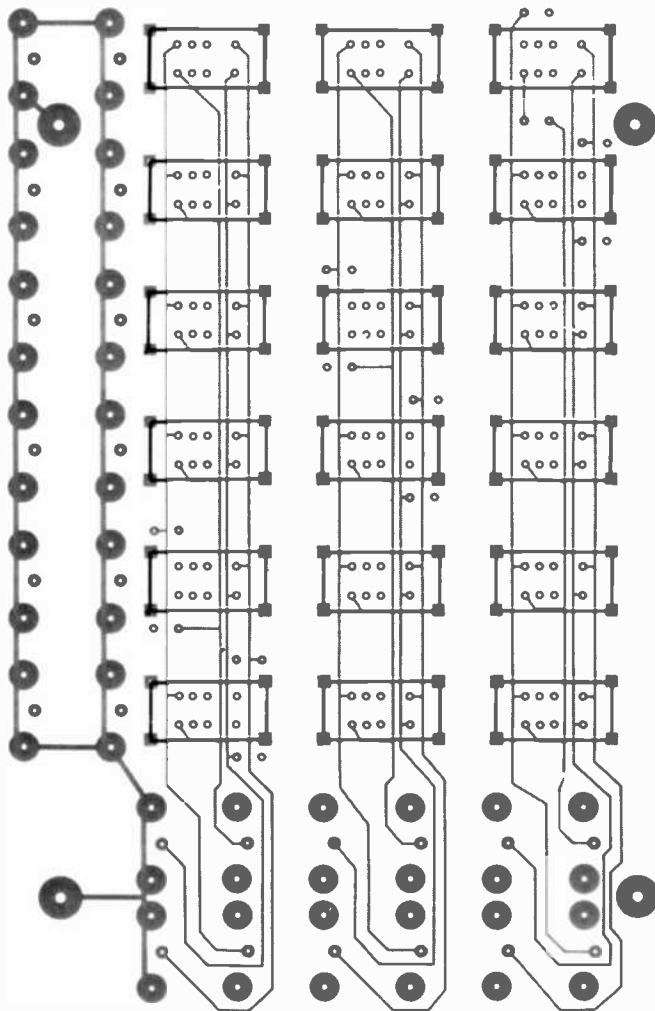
Top side loading diagram shows switches inserted from the component side of the pc board.
